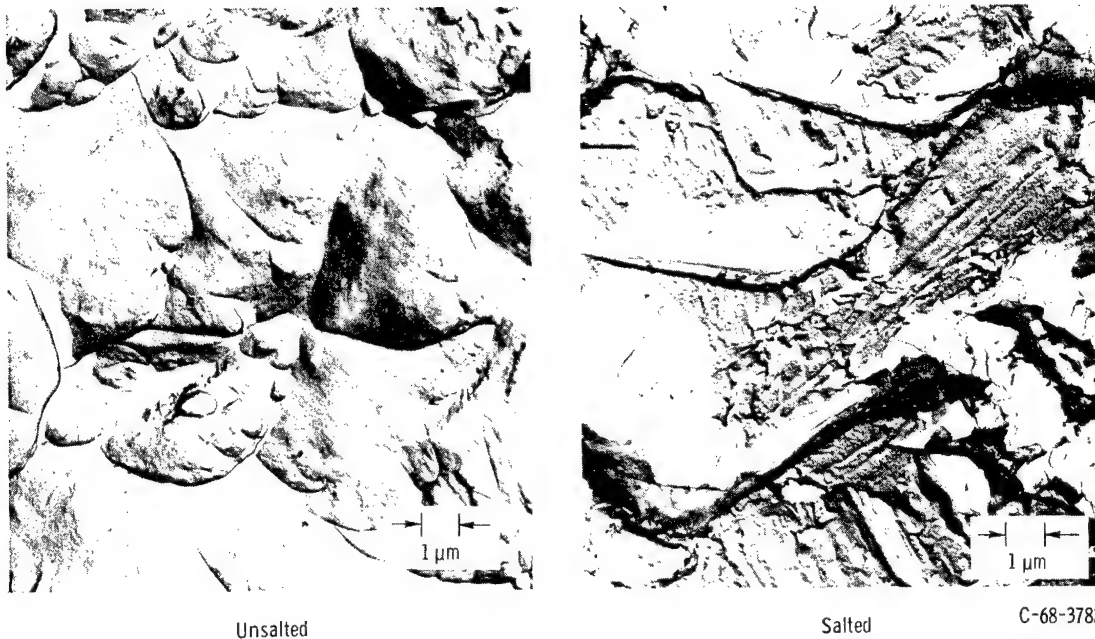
Electron fractographs of typical fracture surfaces of tensile tested Ti-8Al-1Mo-1V alloy specimens previously exposed at 800° F (425° C) for 100 hours at 50 000 psi (350 MN/m<sup>2</sup>).
